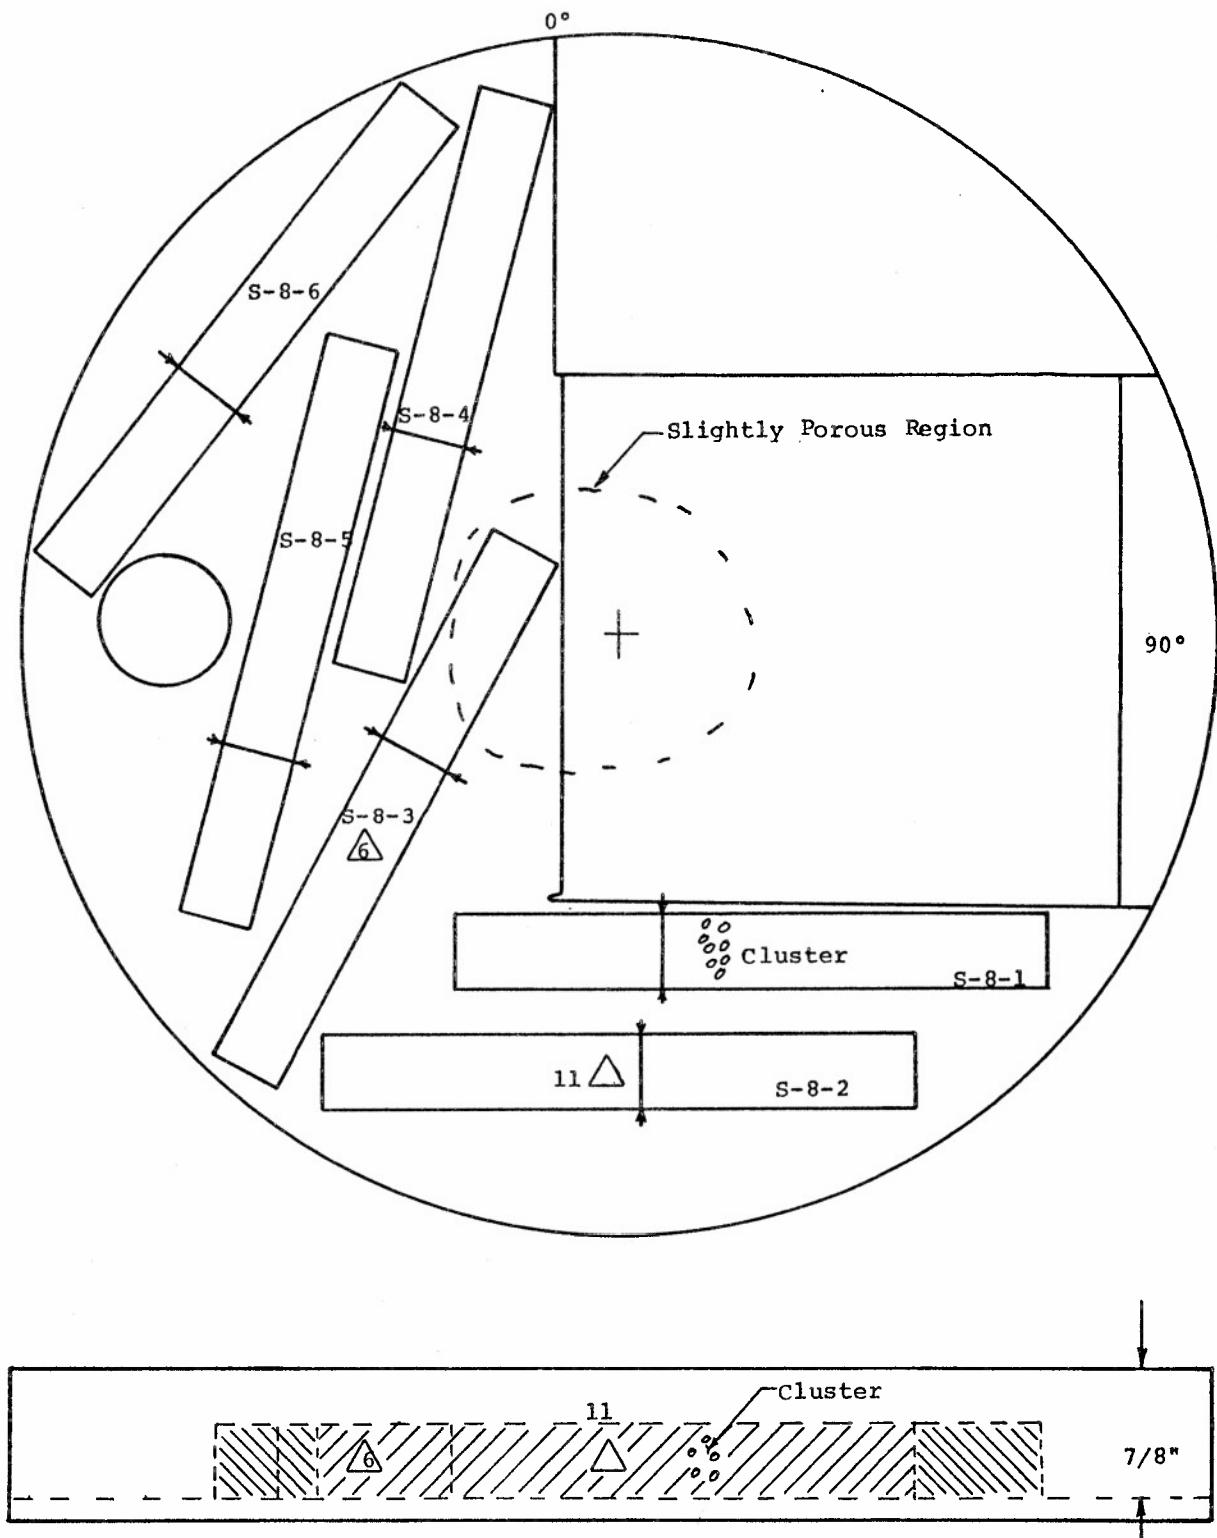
Cutting Plan Showing Results of Avco Ultrasonic Inspection of Specimen Blanks for Slab Number 8, ATJ-S Billet L-16-7
